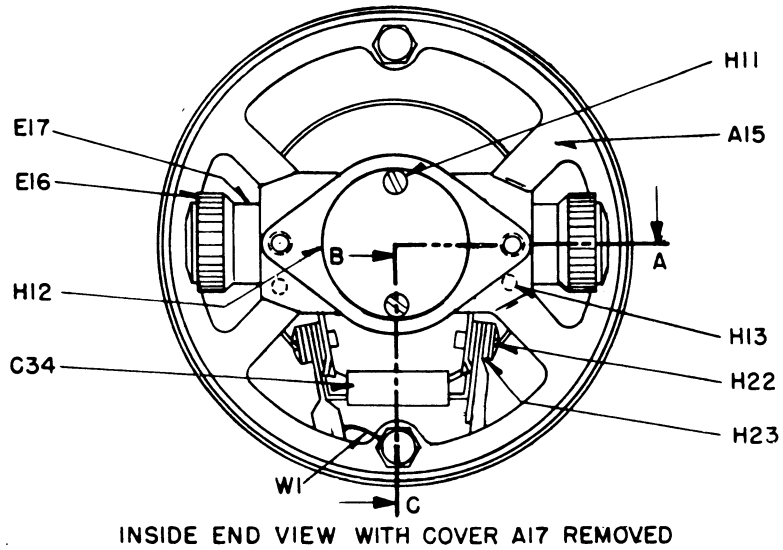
A — LINE DRAWING OF DYNAMOTOR MACHINE USED IN DYNAMOTOR DM-32-A
